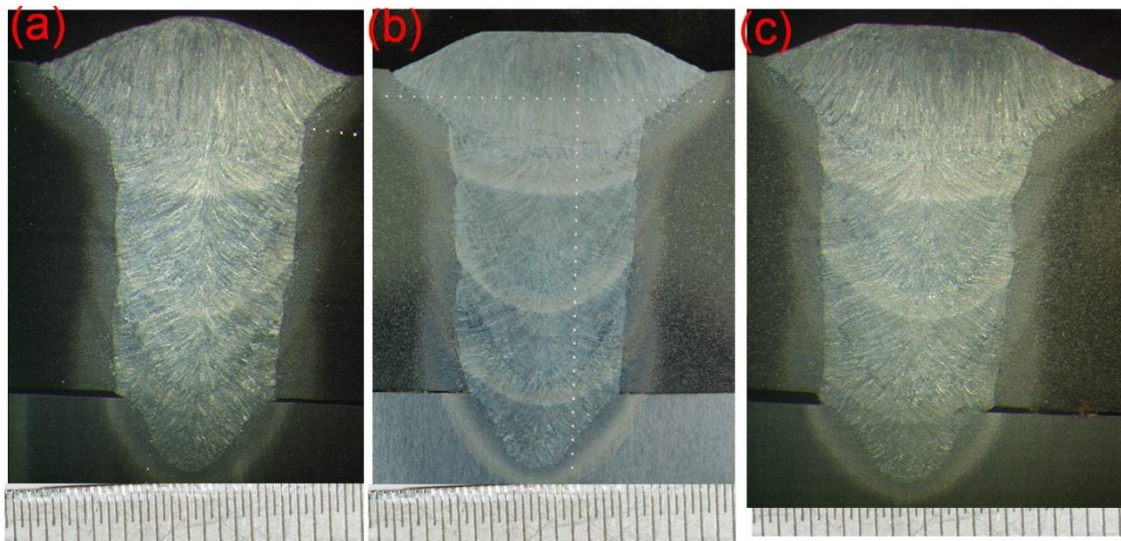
Macrographs of weld deposit layers and weld bead profiles of S275 structural steel (a) as-welded (b) post weld cold rolling (c) post weld cold rolling followed by laser processing
